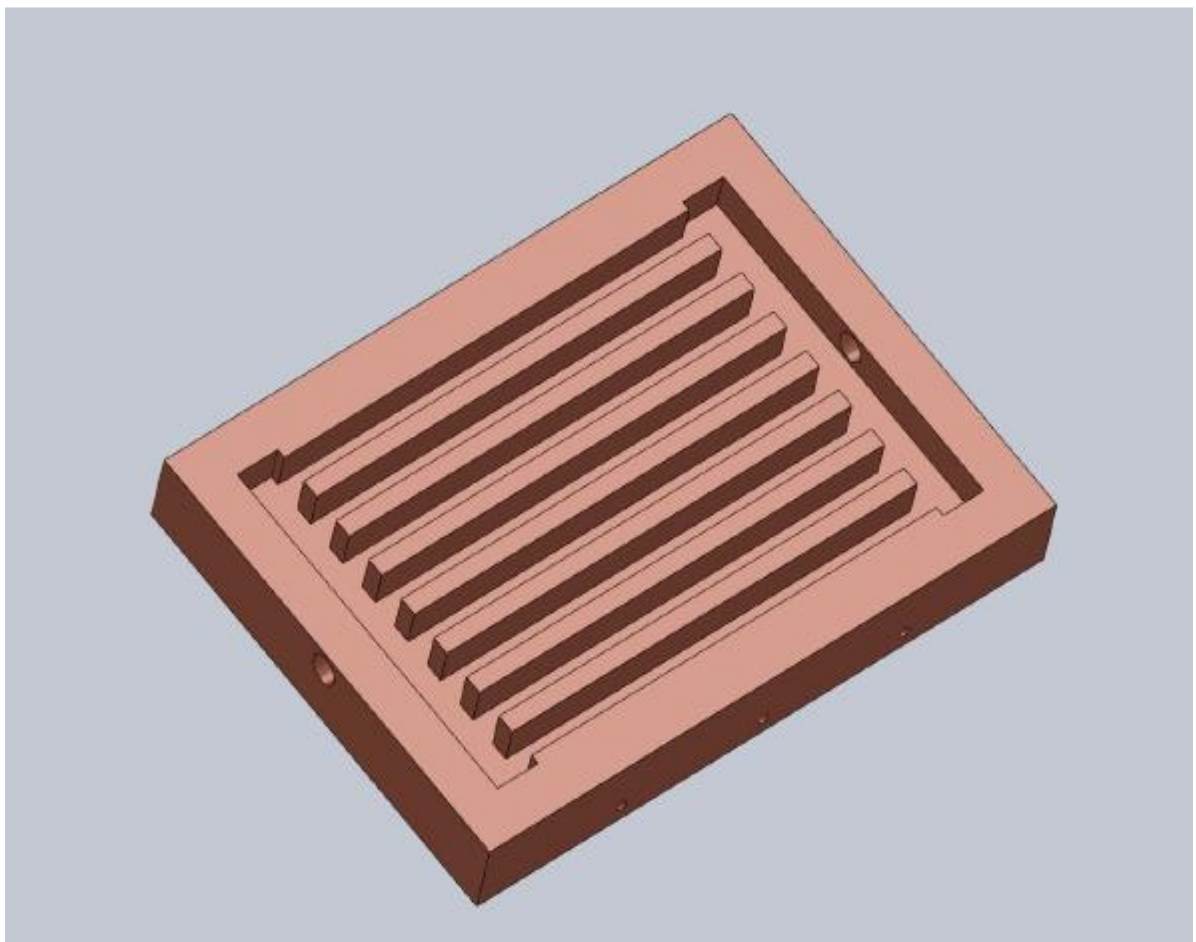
3D- Drawing for the 3mm Minichannel heat sink
